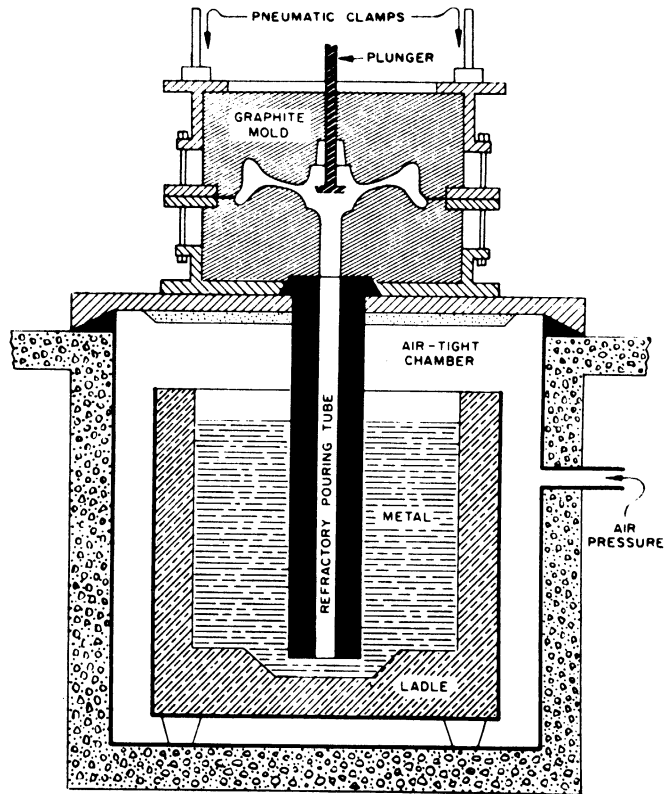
Production of railroad car wheels in pressure-poured graphite mold.
